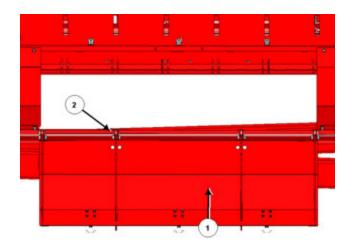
Install flail drum door (Flail drum and guard rods not shown for clarity)
